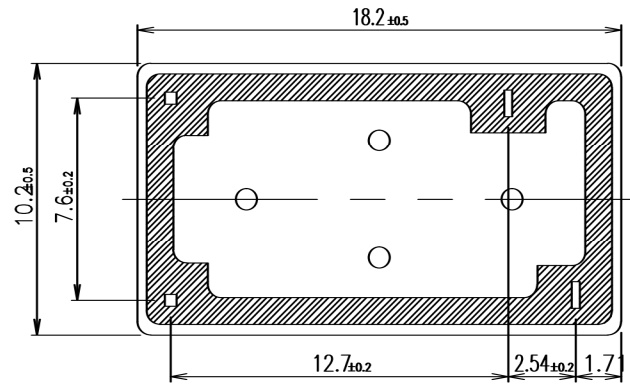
FIGURE FOR PRINTED CIRCUIT BOARD PROCESSING (BOTTOM VIEW)
